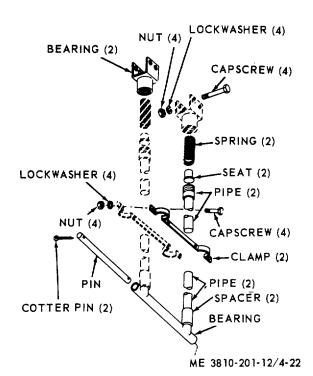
Boom backstop, removal, disassembly, reassembly, and installation.
